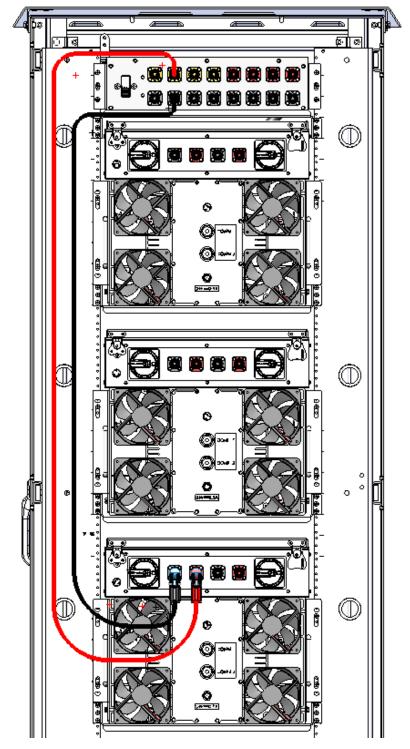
SURLOK CABLING ROUTED TO PRIMARY (INPUT) FEED #3
